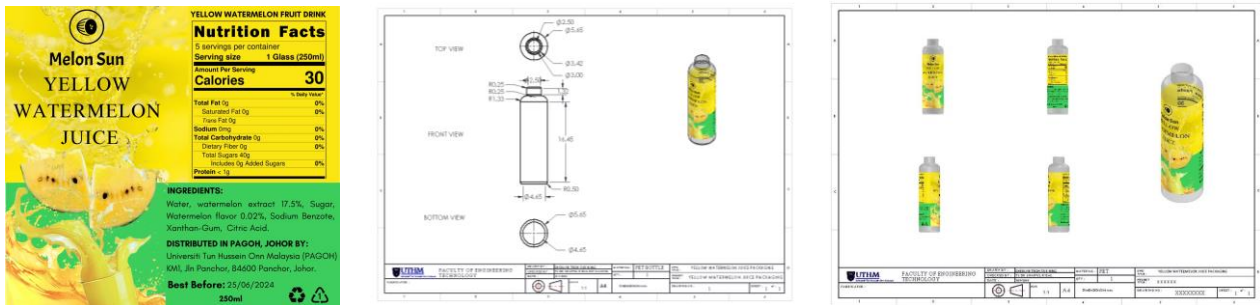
(a) Label Design (b) Dimension Engineering Drawing (c) Isometric 3D View Design
